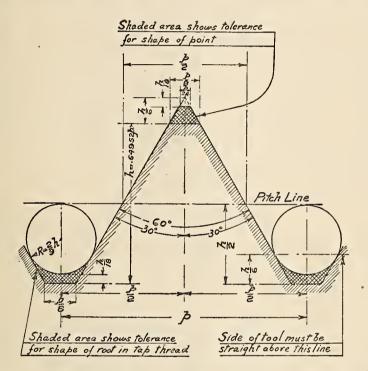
Shape for teeth of tap or internal thread-chasing tool
